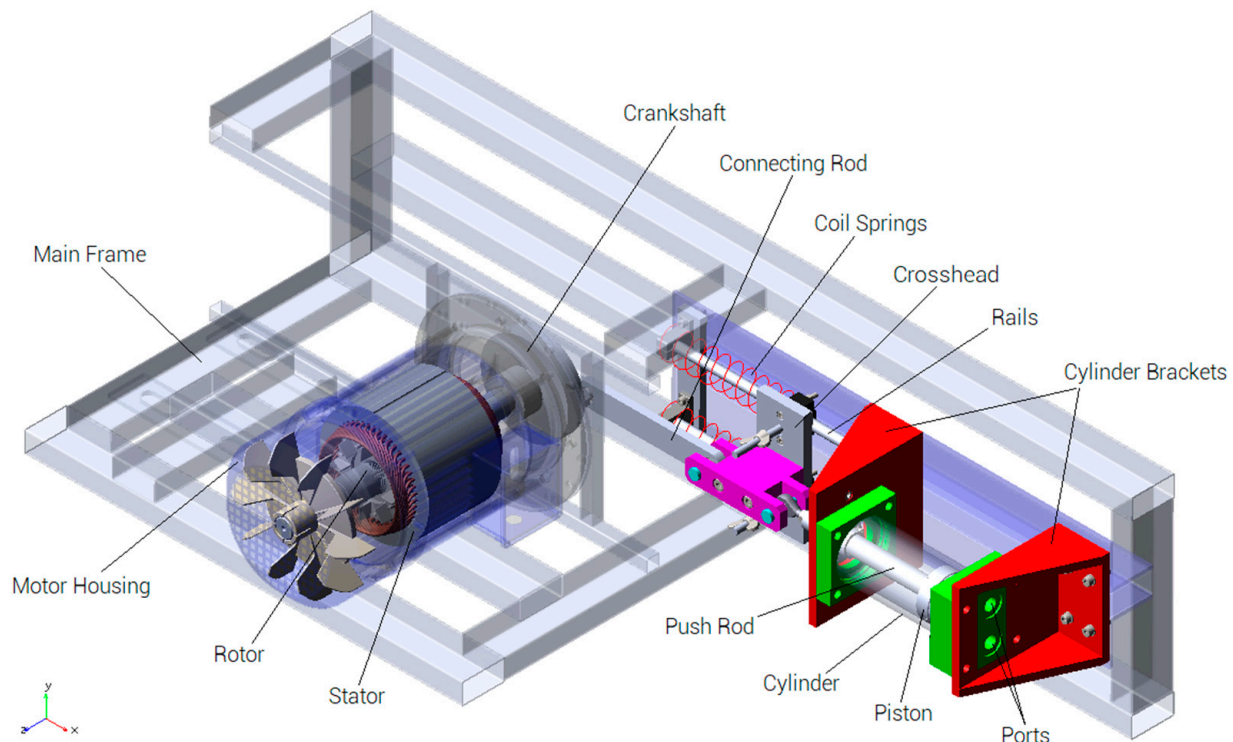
CAD-MBD model of the reciprocating compressor prototype. Electric motor is adapted from [27].
